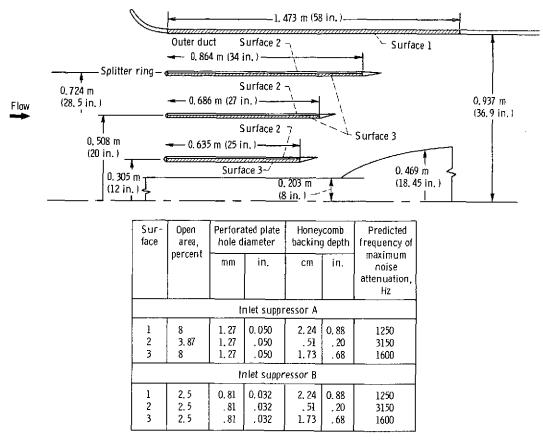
Inlet suppressors. Perforated plate sheet: thickness, 0.51 millimeter (0.020 in.); material, aluminum. Honeycomb cell size, 0.95 centimeter (3/8 in.) hexagon.
